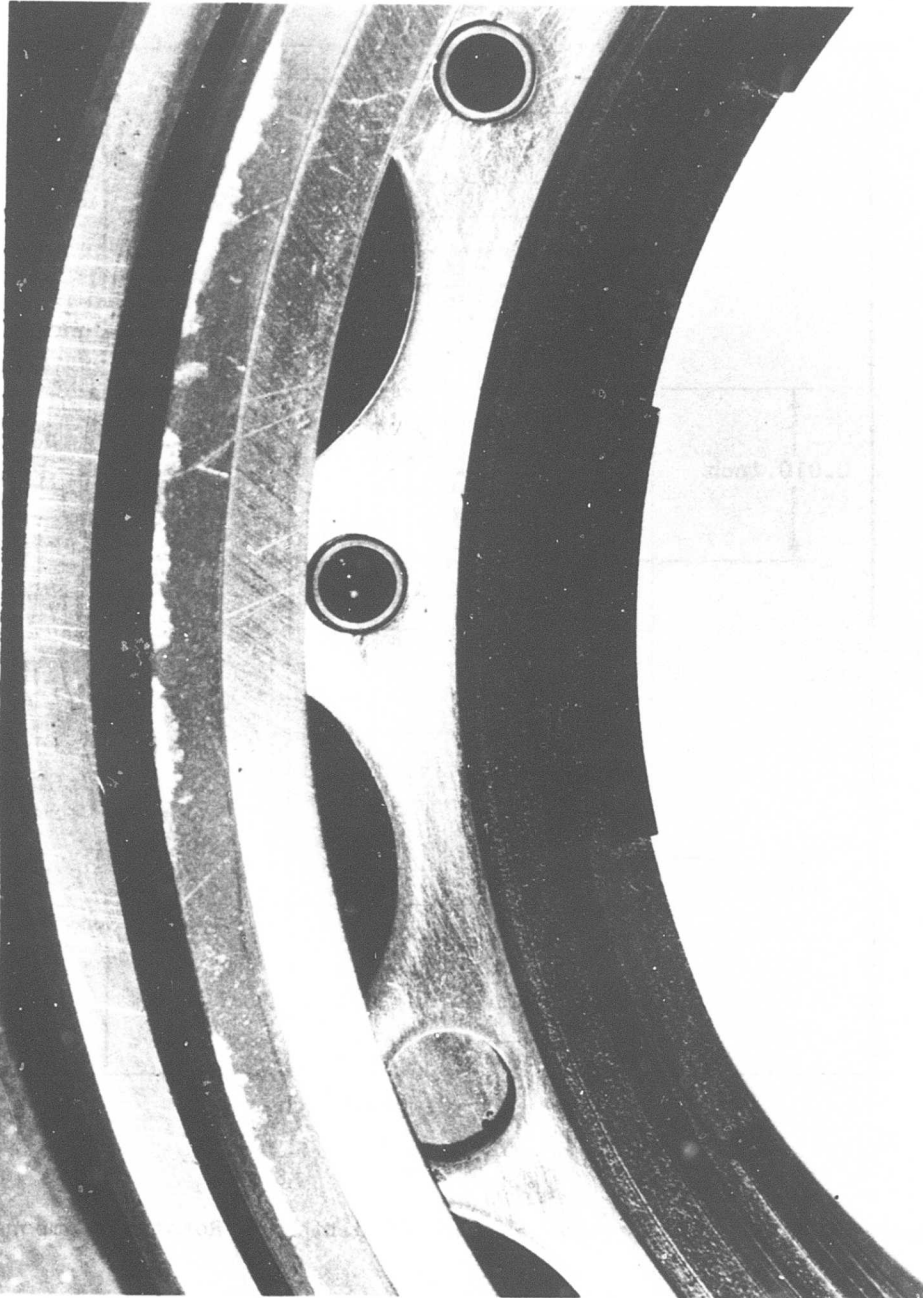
Carbon-Face Seal Stationary Component After Testing.
